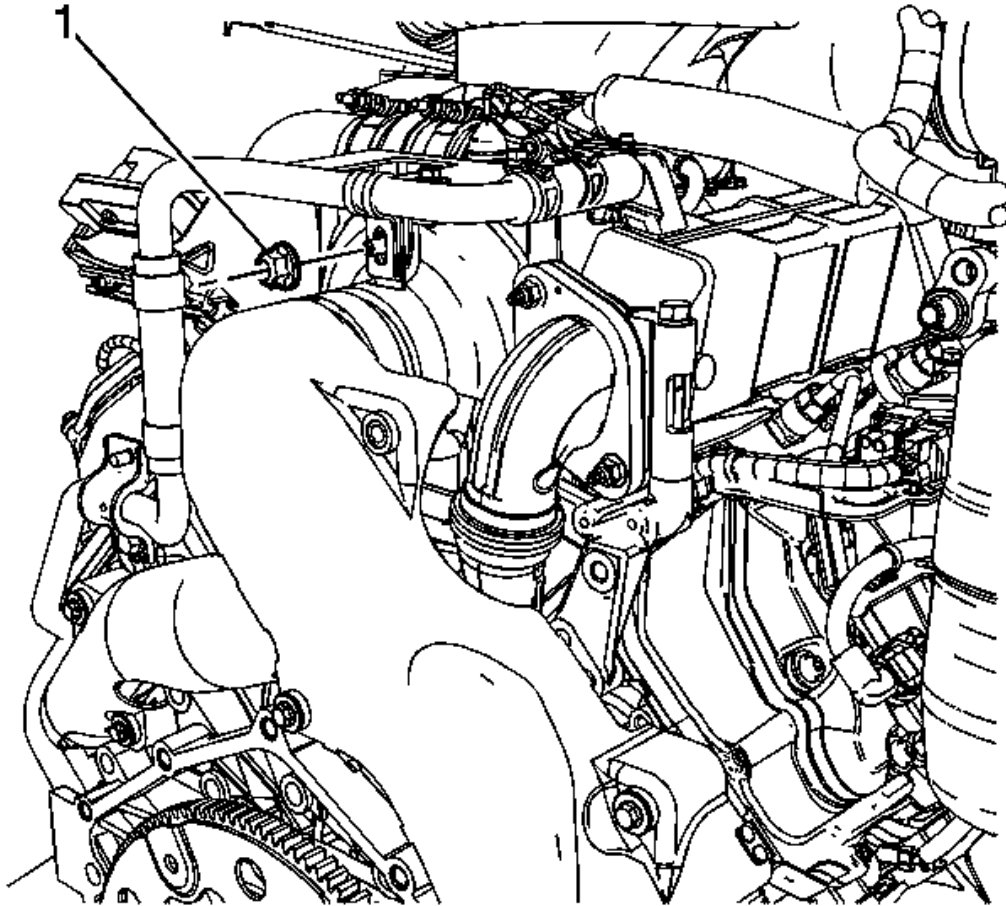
View Of EGR Cooler Pipe Clamp
